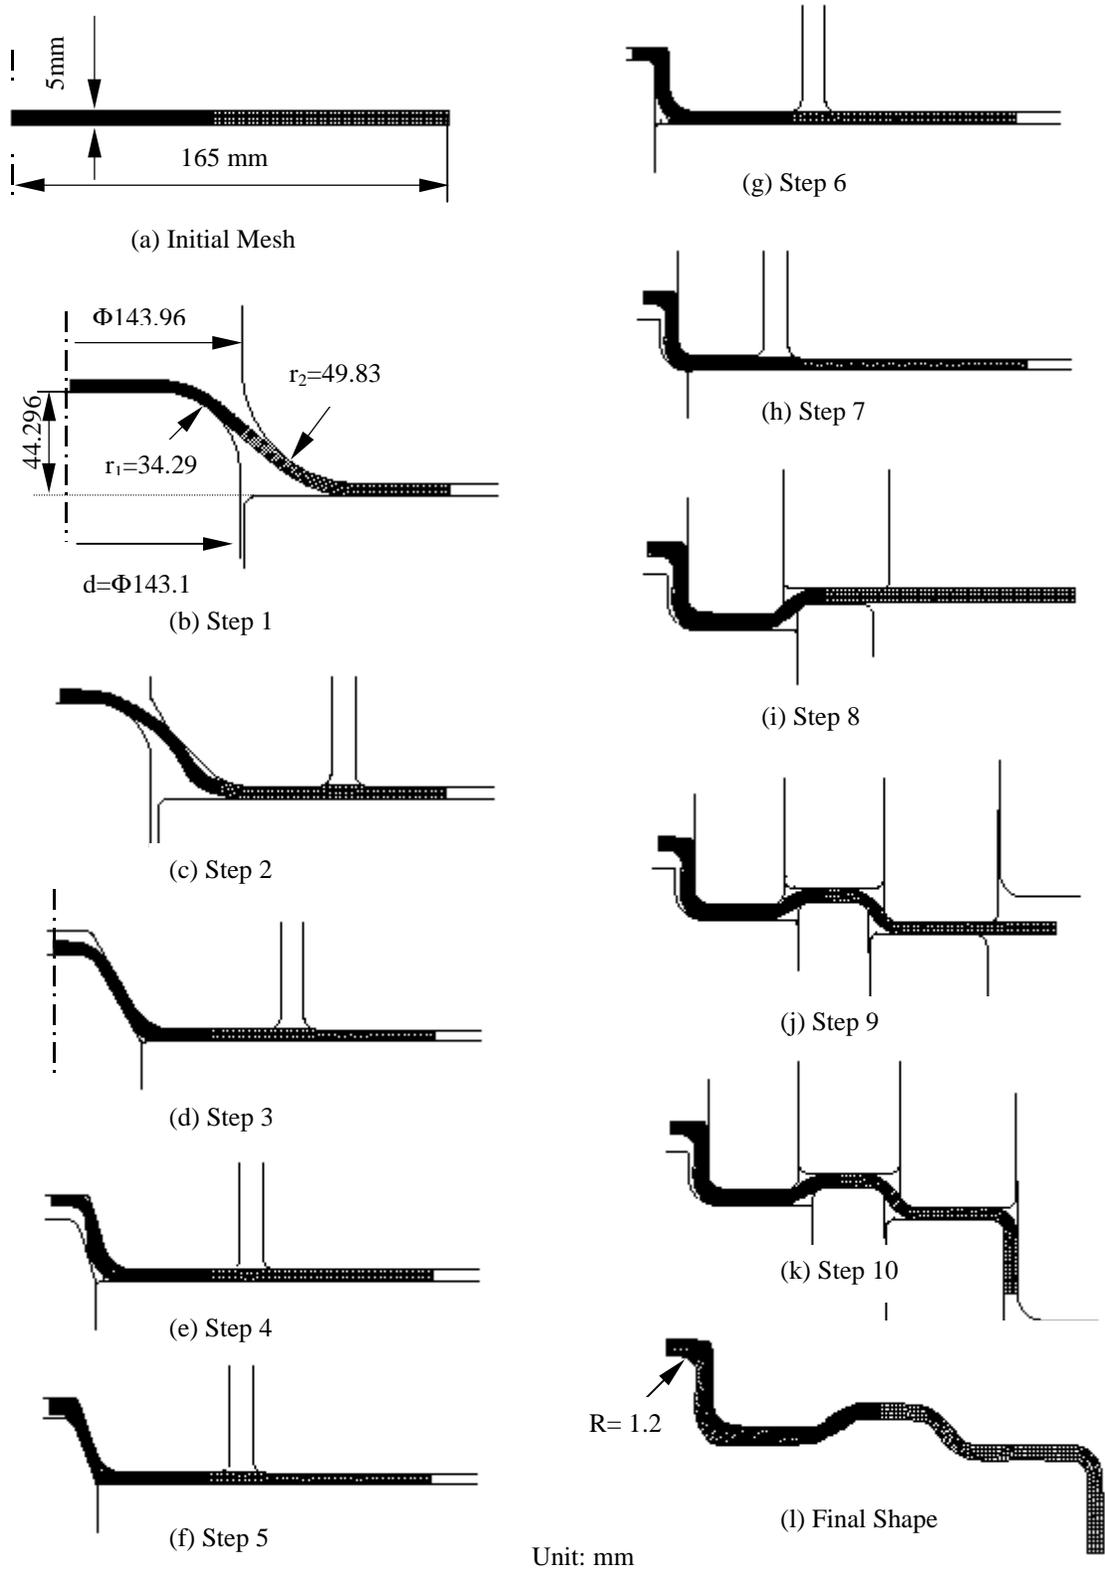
Initial geometry and deformed shapes for each drawing step in the original process.
